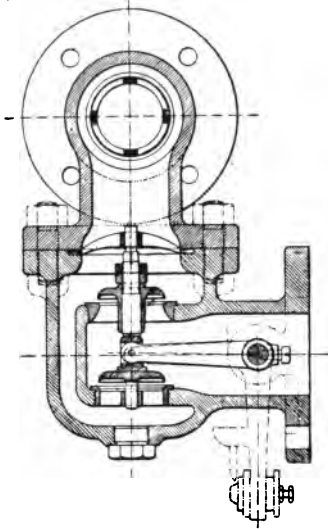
Governor Valve for De Laval Steam Turbine.
